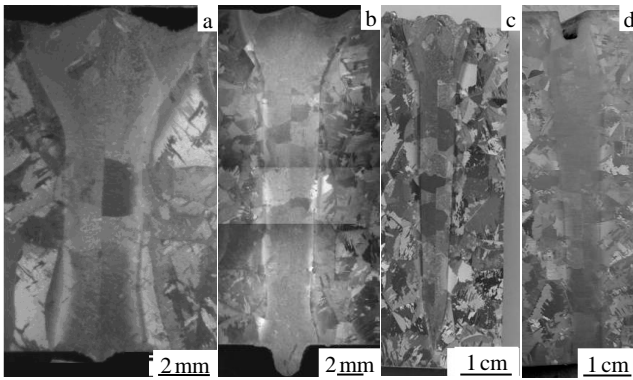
Appearance of ZTC4 plates weld by electron beam welding: (a) 12 mm thickness, (b) 21 mm thickness, and (c, d) 45 mm thickness
